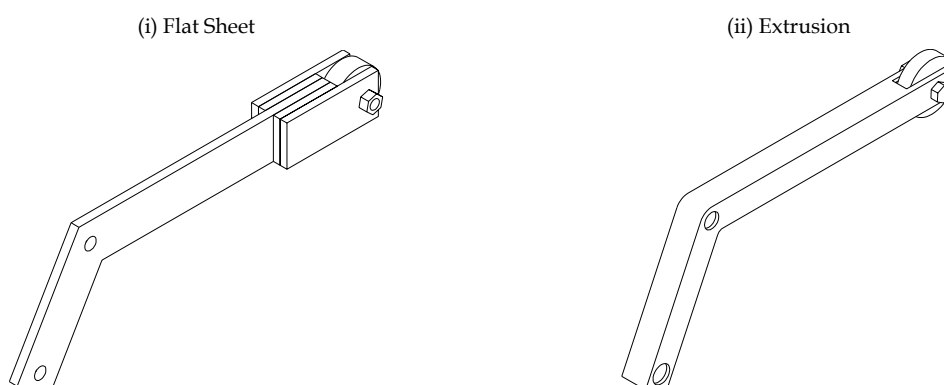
Strut arrangements (i) flat sheet or (ii) extrusion
